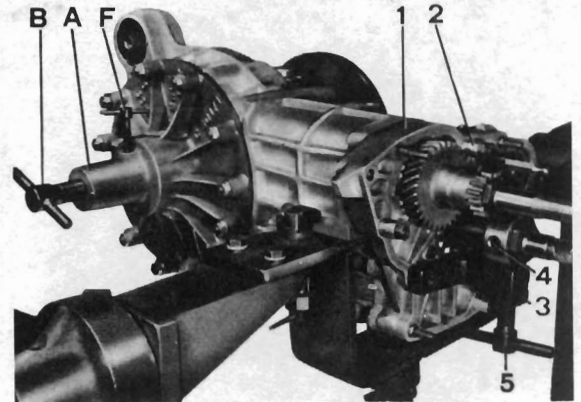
Adjusting crownwheel and pinion backlash (Sec 11)
